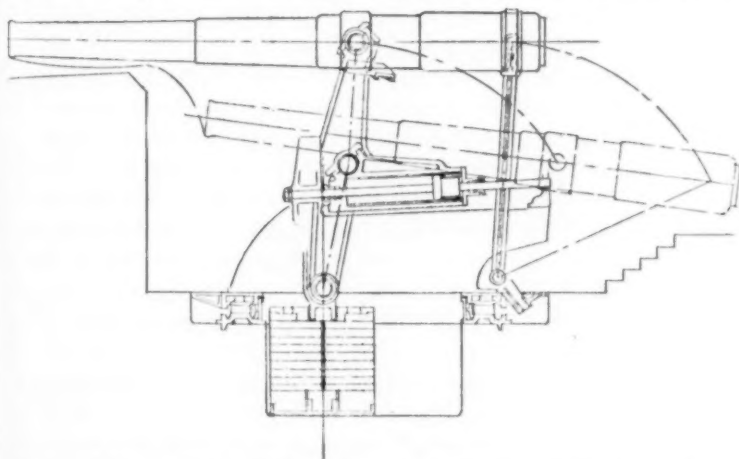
DISAPPEARING GUN MOUNTED UPON BUFFINGTON-CROZIER CARRIAGE
